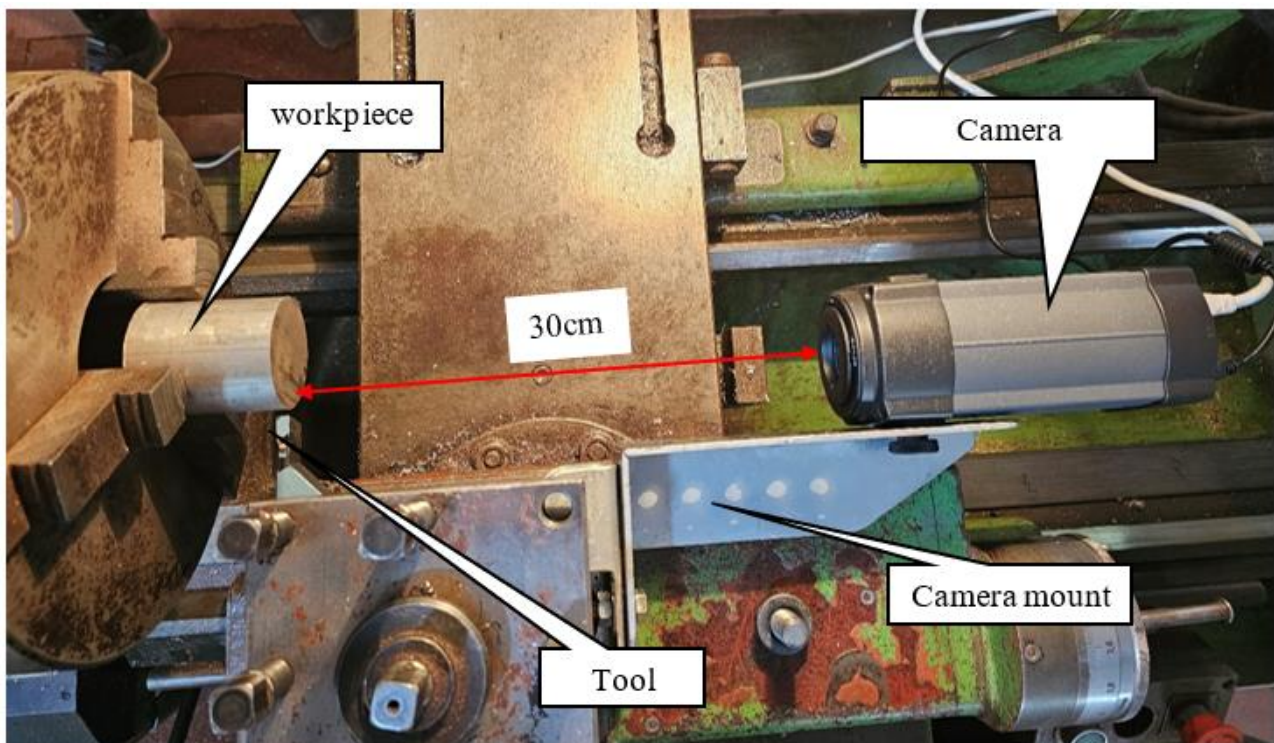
Camera mounted on the turret 30cm away from the cutting edge of the tool.
